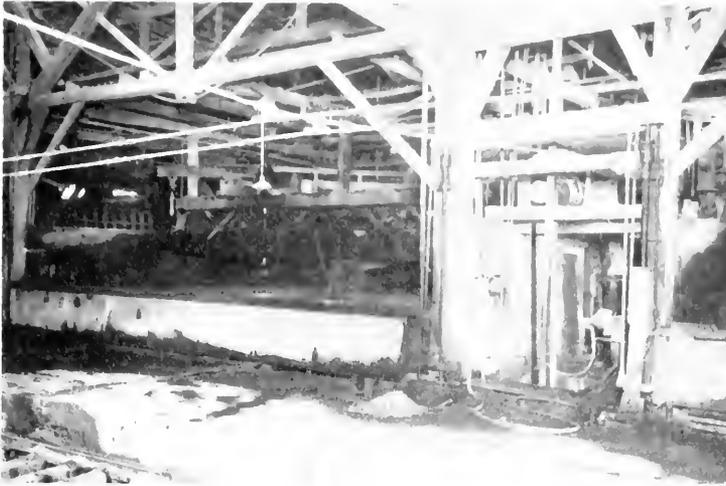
Plate Glass Grinding Table, 28 Ft. 6 In. Diameter, 45 Tons Weight, Driven by a 300-h.p. Slip-ring Induction Motor. Motor at right drives a centrifugal pump for handling the grinding mixture of sand and water
